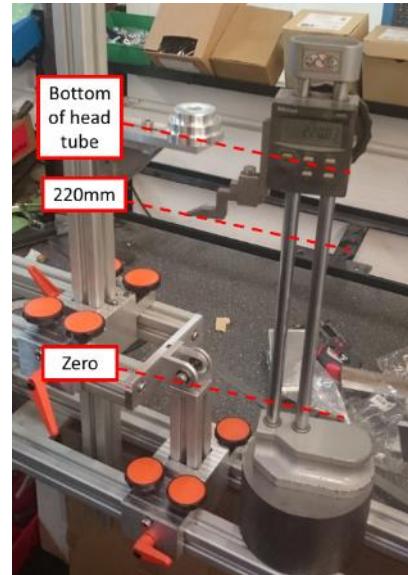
Height gauge set at 220mm, the bottom of the head tube must be aligned with the height gauge.
